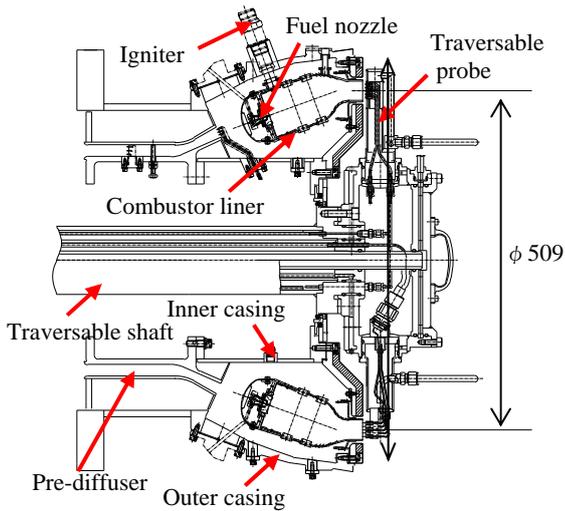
Schematic drawing of full annular combustor with traversable measurement system.
